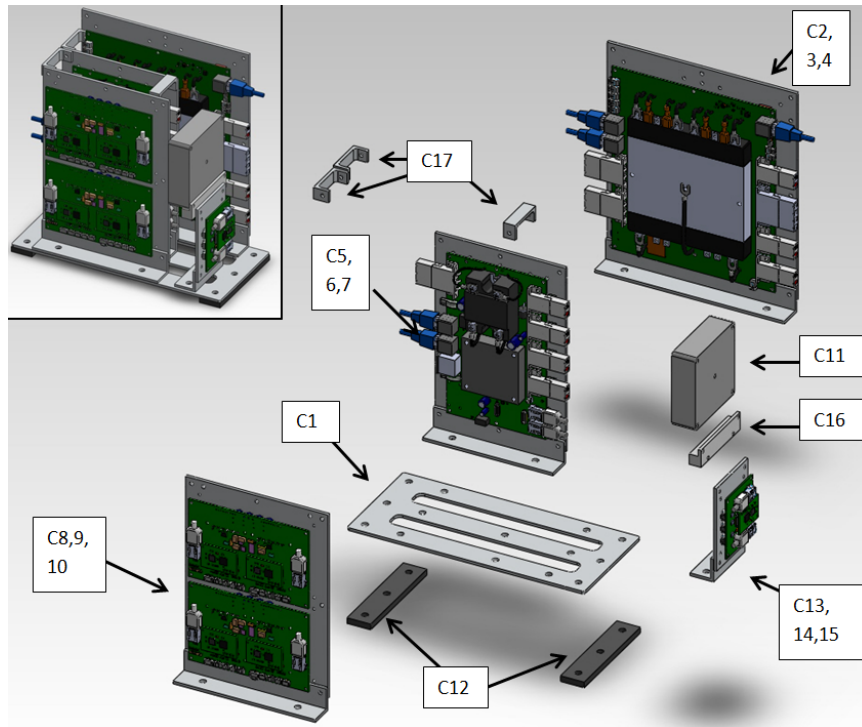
Exploded view of the electronics module. Refer to Table 3.3 for part designations.
